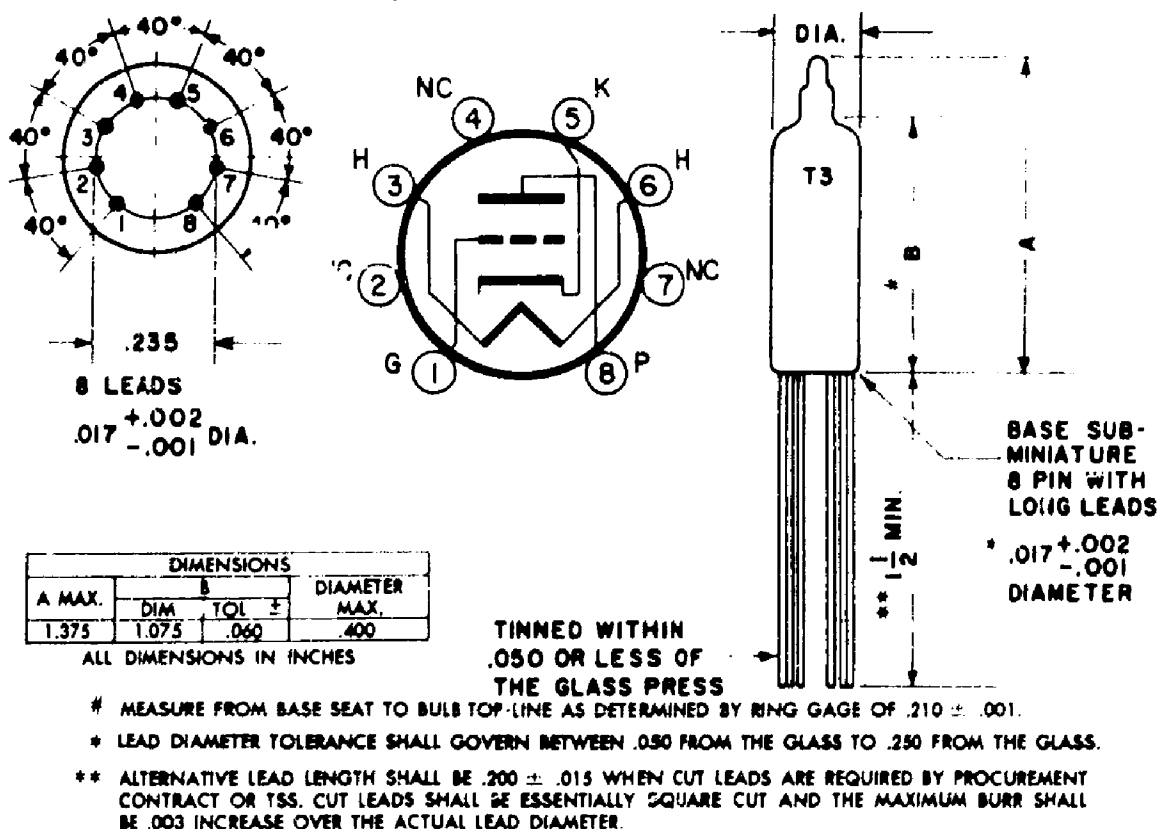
Outline Drawing and Base Diagram of Tube Type JAN-5719
